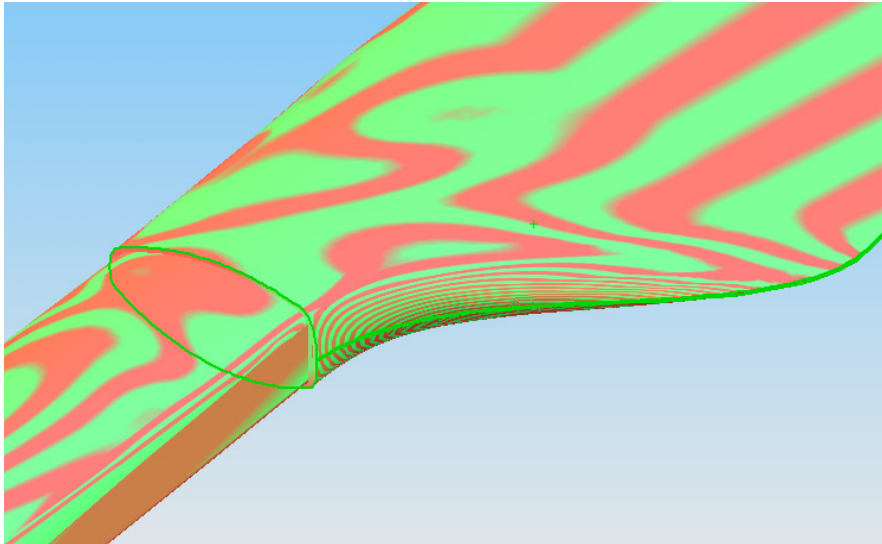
, FULLY DEFINED TRANSITION SECTION, ZEBRA STRIPING
